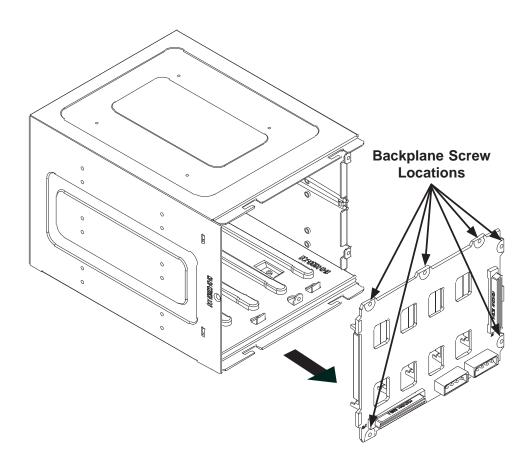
Removing the Mobile Rack Backplane (Optional)
